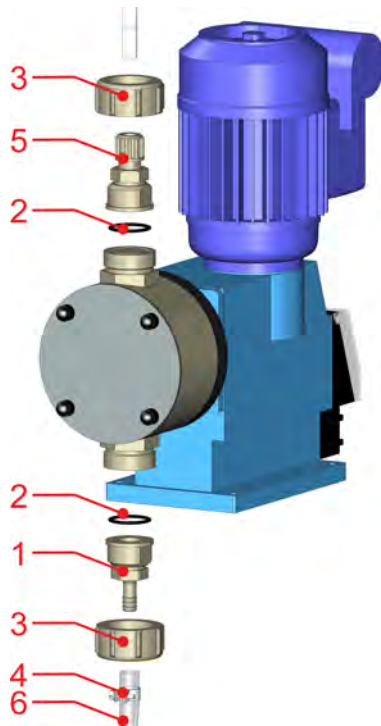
Assembly of the pump connection kit for the EMP III pump (80 / 120 l/h)
